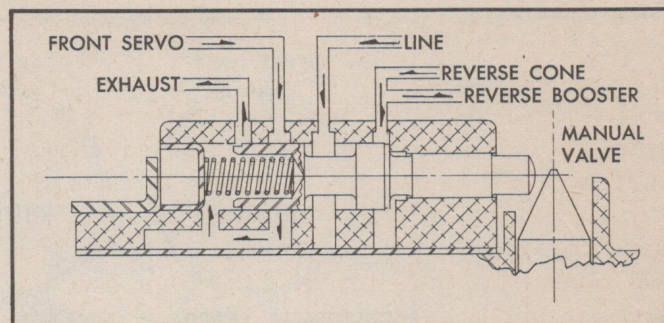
Front Servo Exhaust Valve—Immediately After Shift to Reverse
